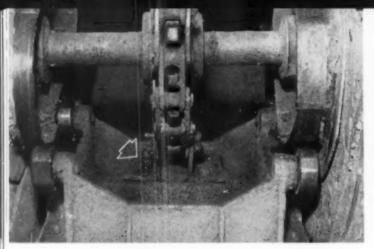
(left) Engine assembly line was shut down because shear pins were broken due to loose fastener.
